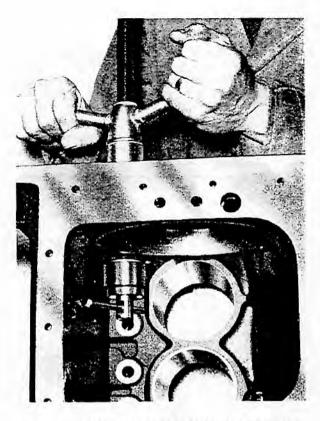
REMOVING REAR CAMSHAFT BEARING
